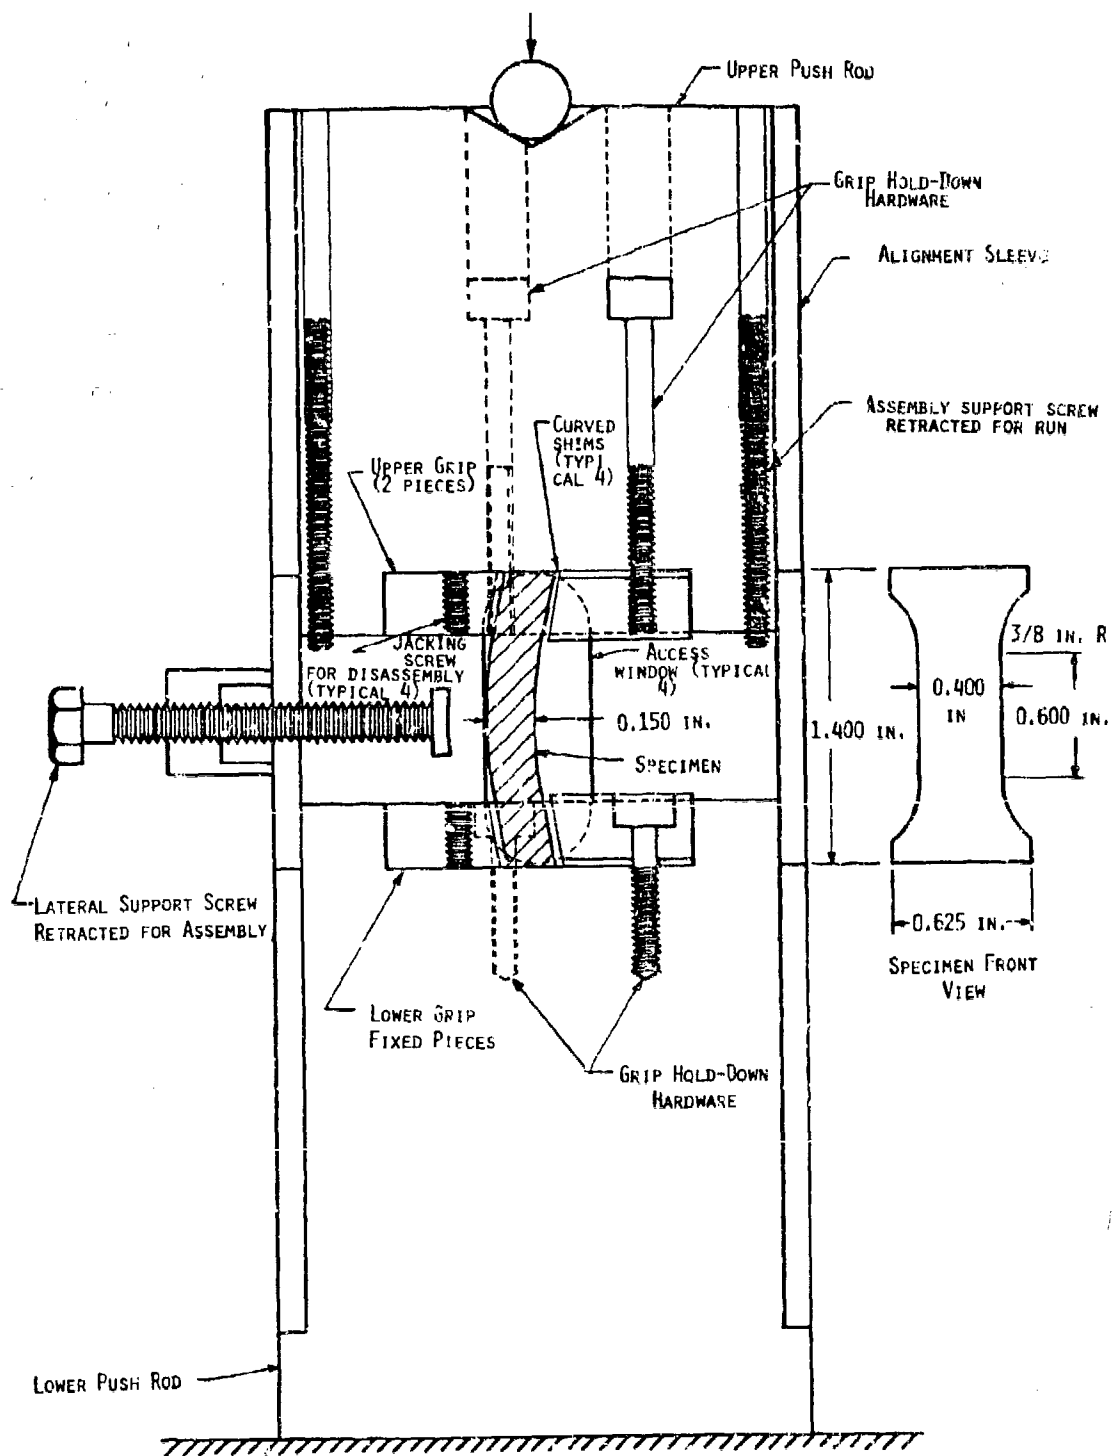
CURVED SPECIMEN COMPRESSION TEST FIXTURE
